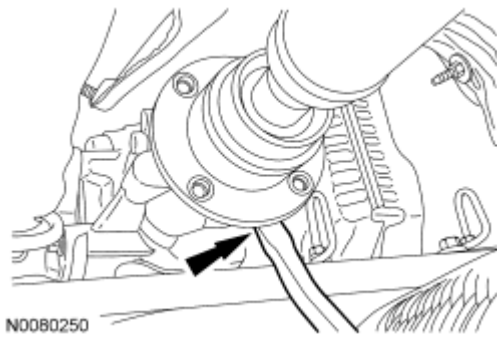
Separating Driveshaft From Power Transfer Unit (PTU) Flange Using A Suitable Pry Bar
